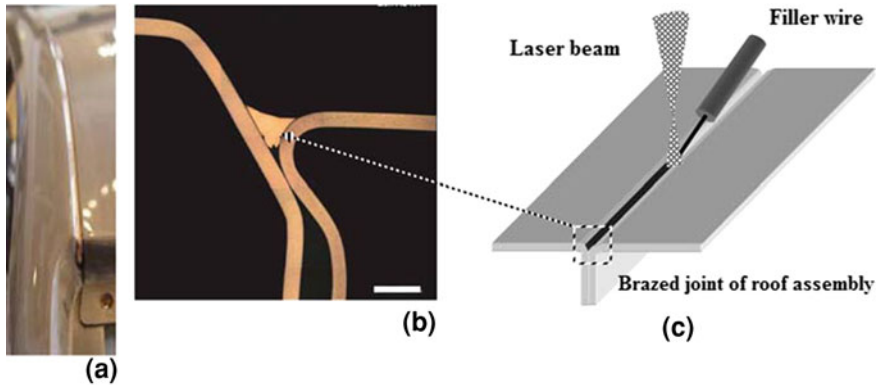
Laser brazed joint: a automotive roof assembly, b cross section showing filled flanges, and c flange joint schematic [52]
